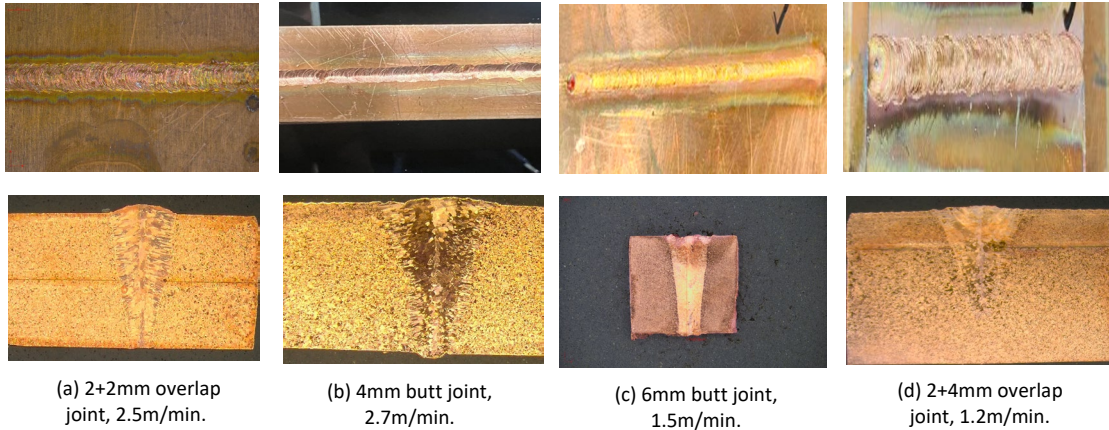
Copper welding, (a) 4.5+1.5kW, (b) 4.5+1.5kW, (c) 5.0+2.0kW, (d) 6.0+ 2.0kW
